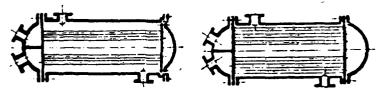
Diagram of heat exchanger with mobile tube plate and cover/cap.
